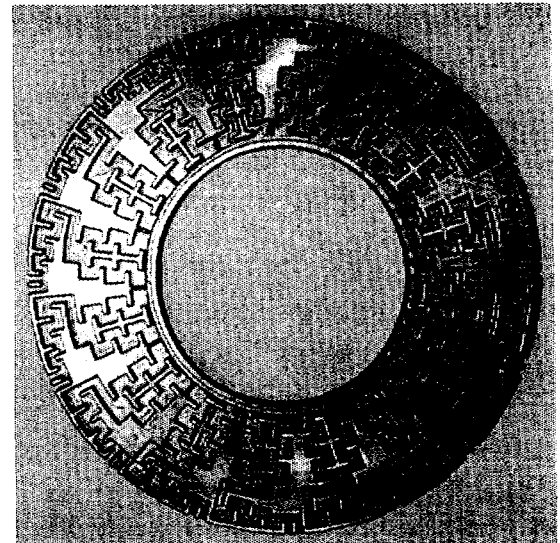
Prototype of disk made by machining center (MAKINO V55)
